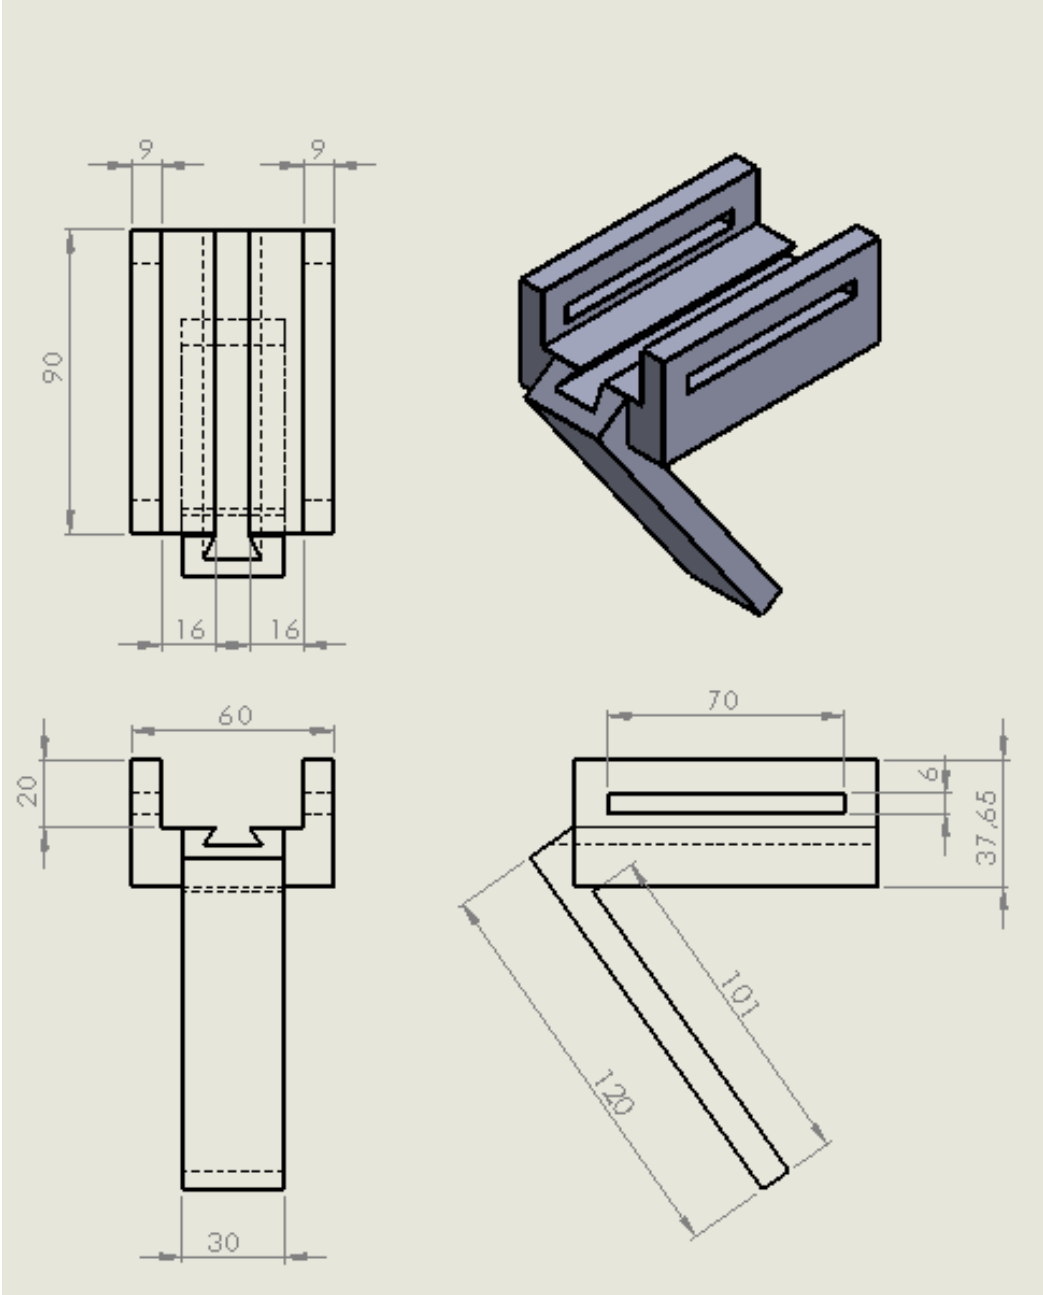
Drawing of the “PH sliding mechanism” with dimensions.
